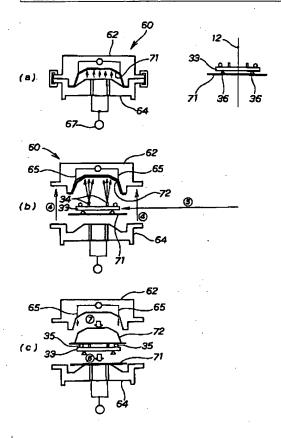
Operation explanatory drawing of drawing [an injection-cum-] equipment (the 2)
